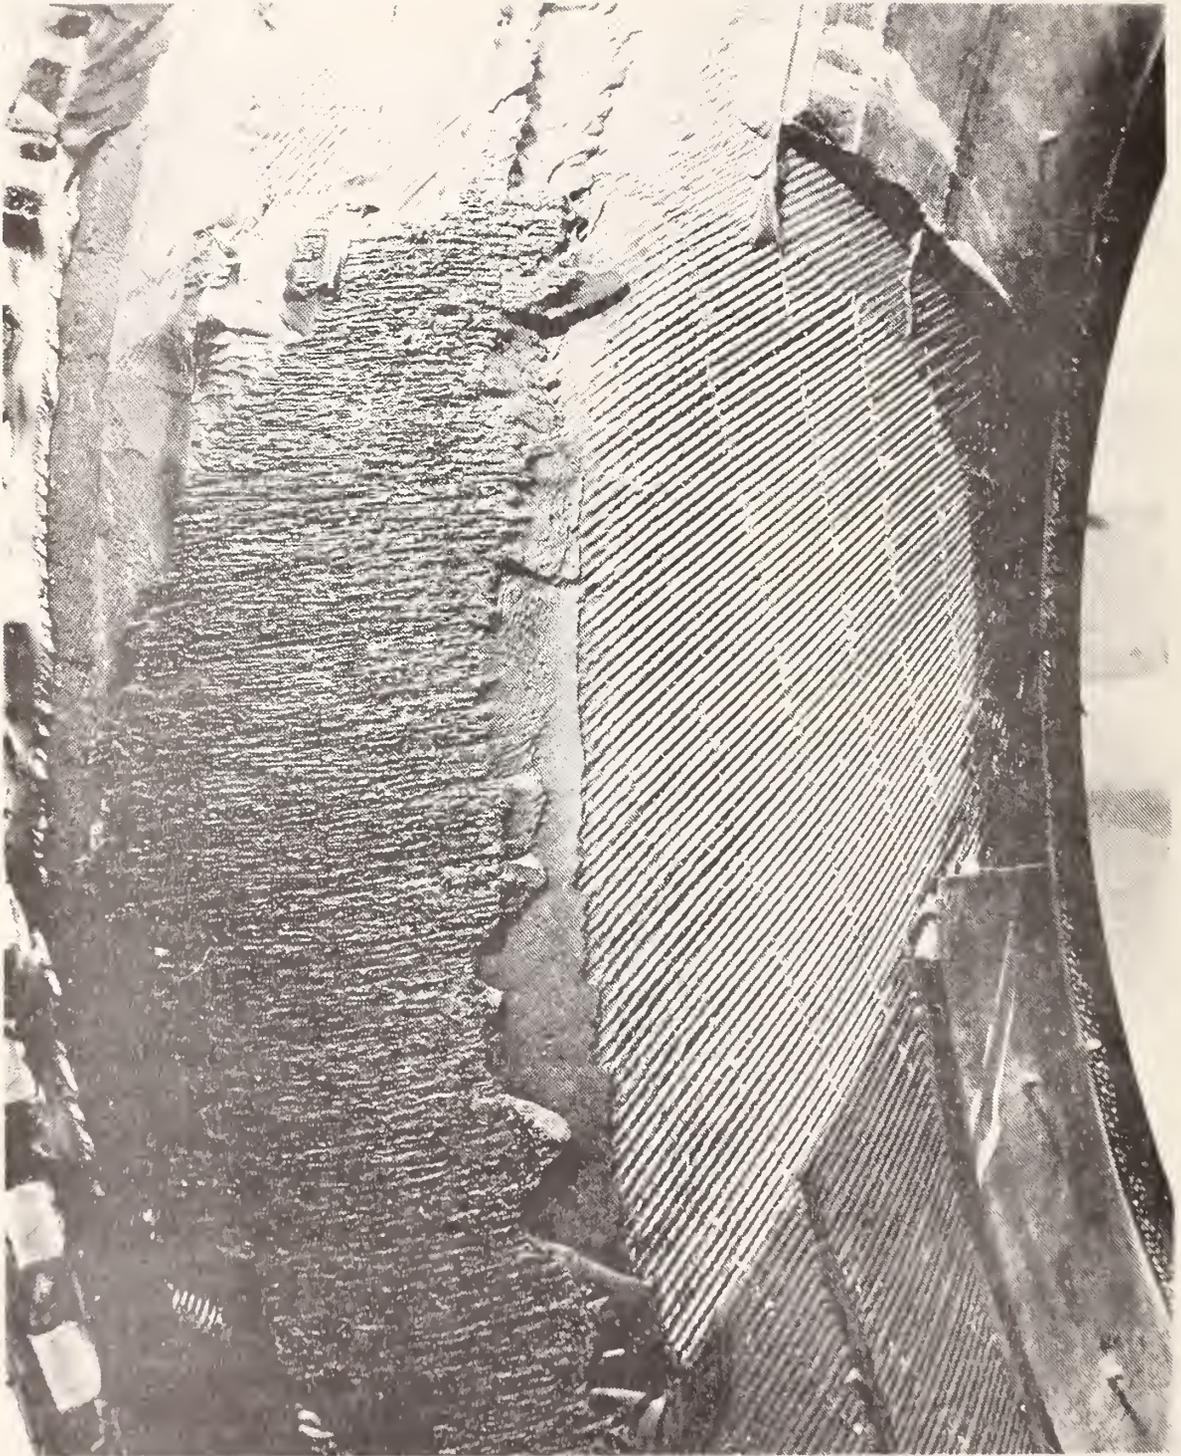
Sidewall Separation and Area of Poor Rubber Adhesion T5X 1161
